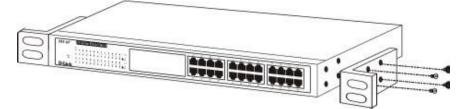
Attaching the mounting brackets to the 10/100 Fast Ethernet Switch
